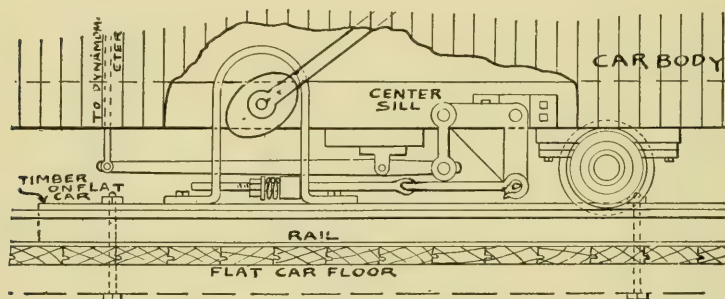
Sketch Showing General Arrangement of Safety-Locking Device and Car Body Dynamometer.
